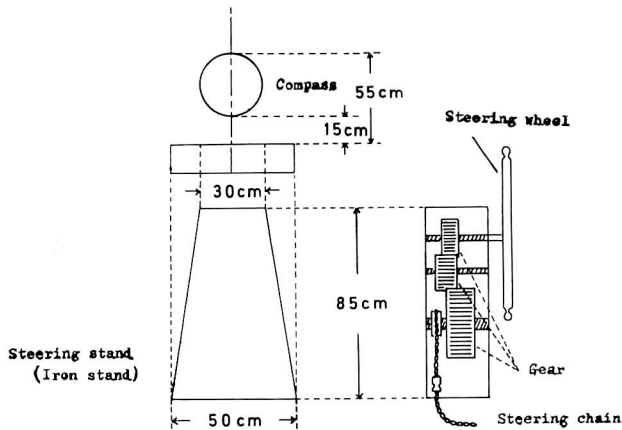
Sketch showing the hand steering devices in the Nishio-maru.
